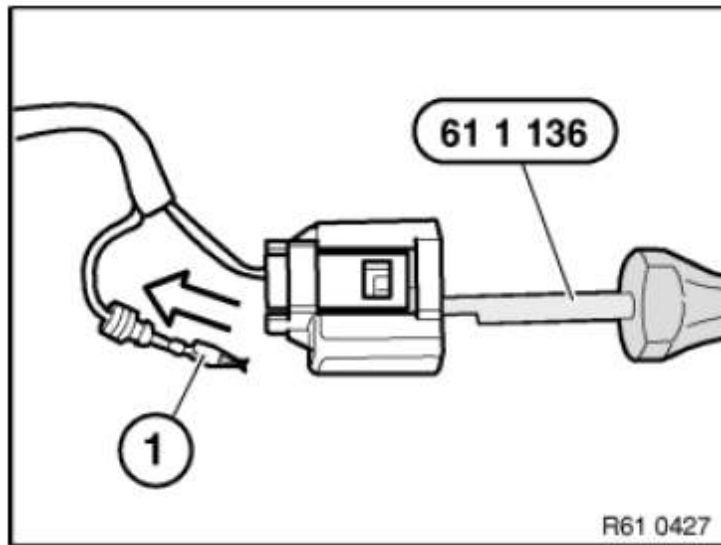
Pulling Out Cable With Contact Using Special Tool (61 1 136)
